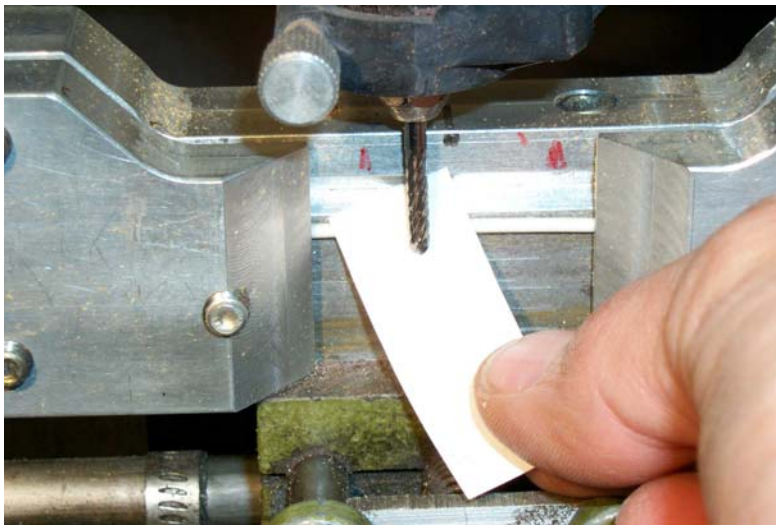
Wire-to-Bit Spacing Adjustment Using Small Piece of Paper
